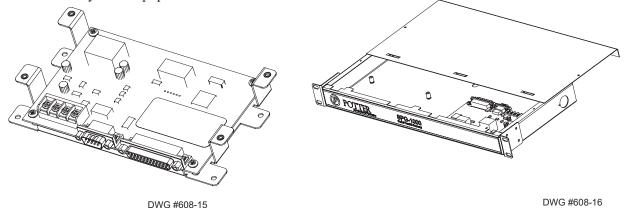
SPG-1000 Serial Parallel Gateway Board & Rack Mount
